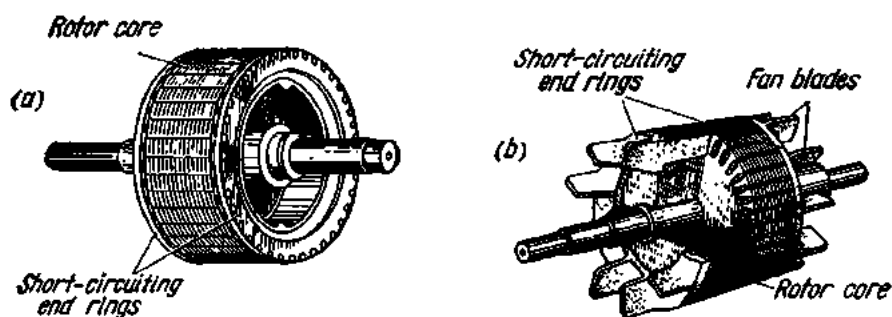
General and cut-away views of a squirrel-cage rotor:
